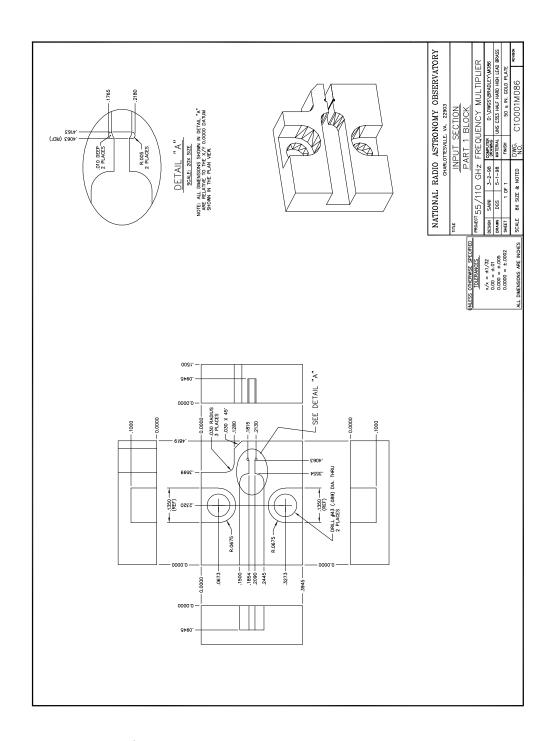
55/110 GHz frequency doubler: Mechanical details of the input section insert of part 1 of the two piece split block.
